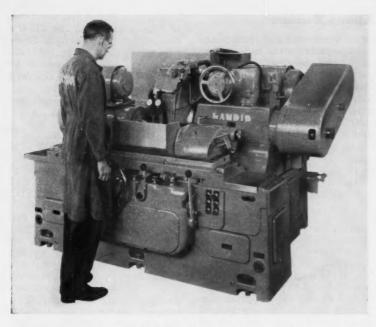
Landis plain hydraulic grinding machine equipped to grind two diameters of propeller shaft sleeve, removing 0.020 inch of stock
